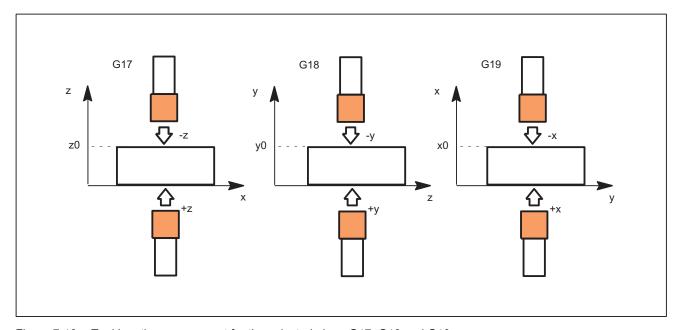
Tool length measurement for the selected plane G17, G18 and G19
